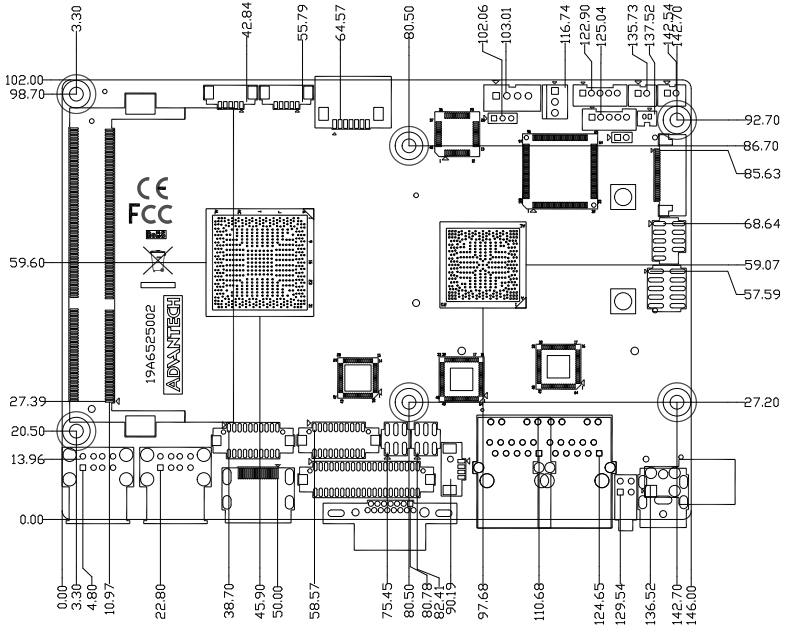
MIO-5250 Mechanical Drawing (Top Side)
